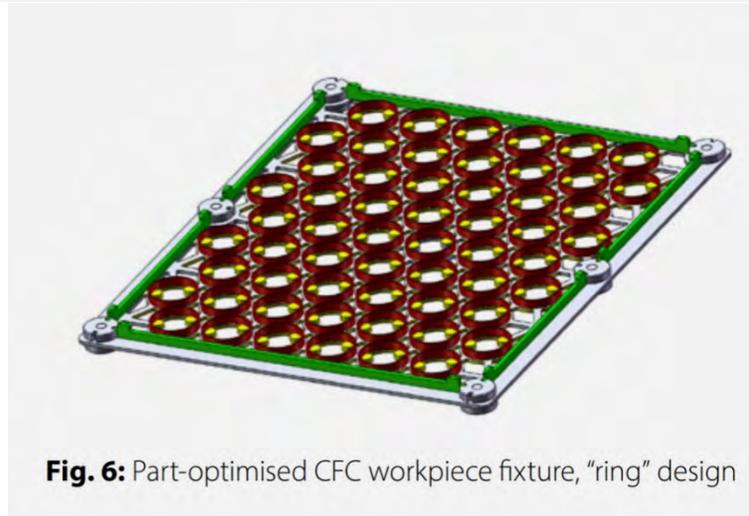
Part-optimized CFC workpiece fixture, "ring" design
